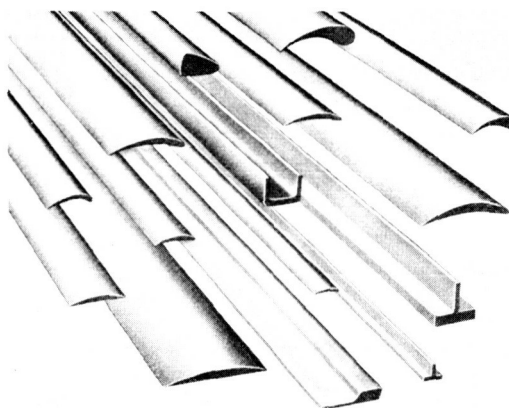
TYPICAL ROLLED SHAPES FABRICATED FOR JET AND GAS-TURBINE ENGINES
